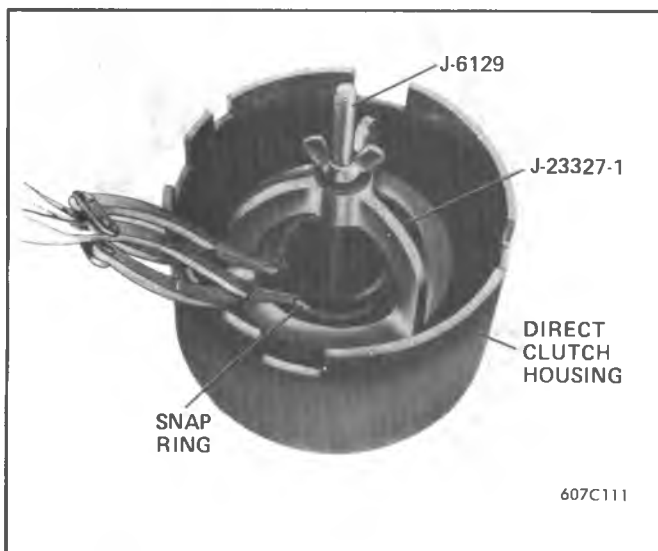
A1-111 Removing Direct Clutch Inner Snap Ring
